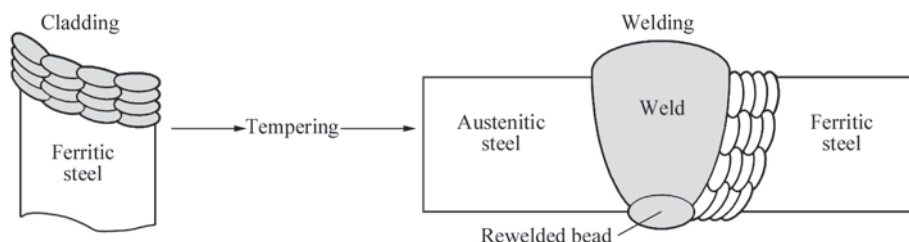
Scheme of producing welded joint with preliminary cladding
